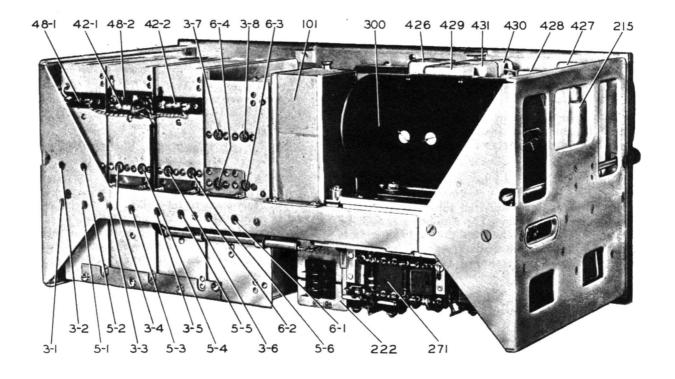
RADIO RECEIVER BC-224-B: REAR VIEW OF CHASSIS
